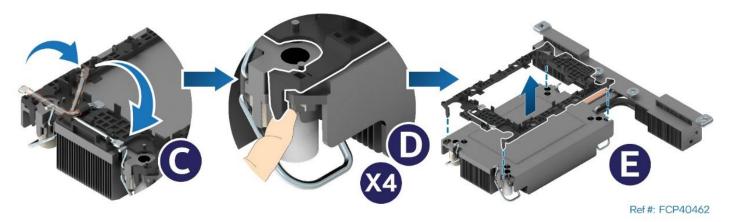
Processor Carrier Clip Removal from PHM Assembly
